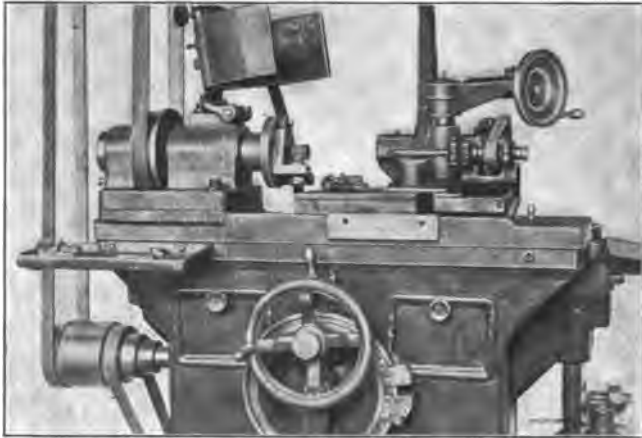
Grinding the Holes in the Universal Joint Pivots
